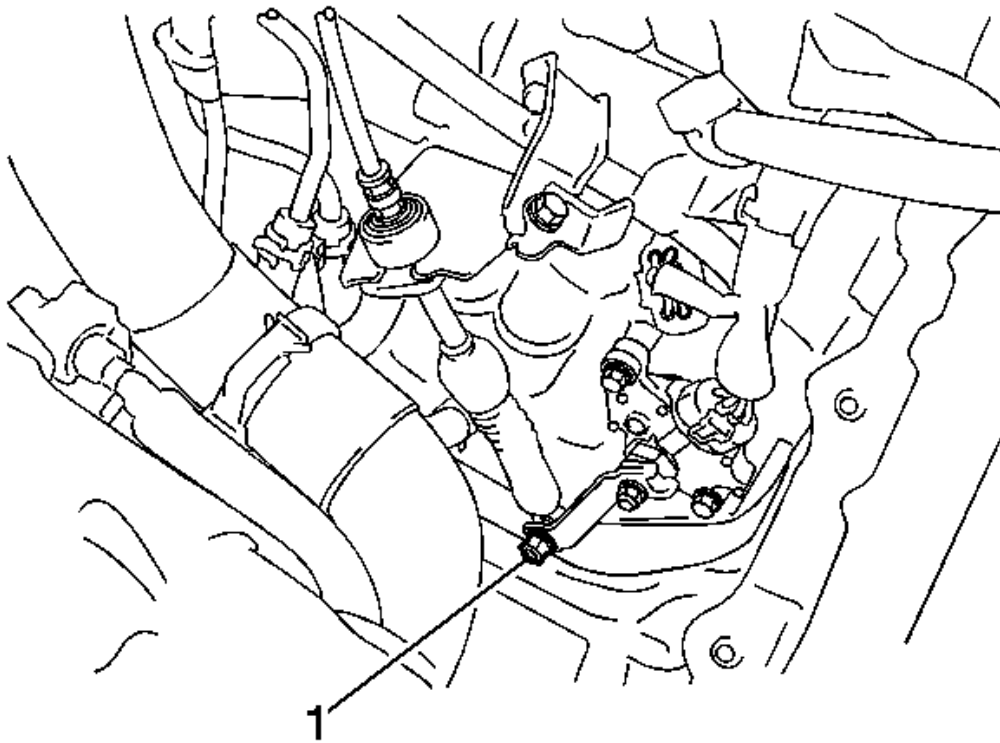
Locating Cable Assembly & Control Shaft Lever Bracket
